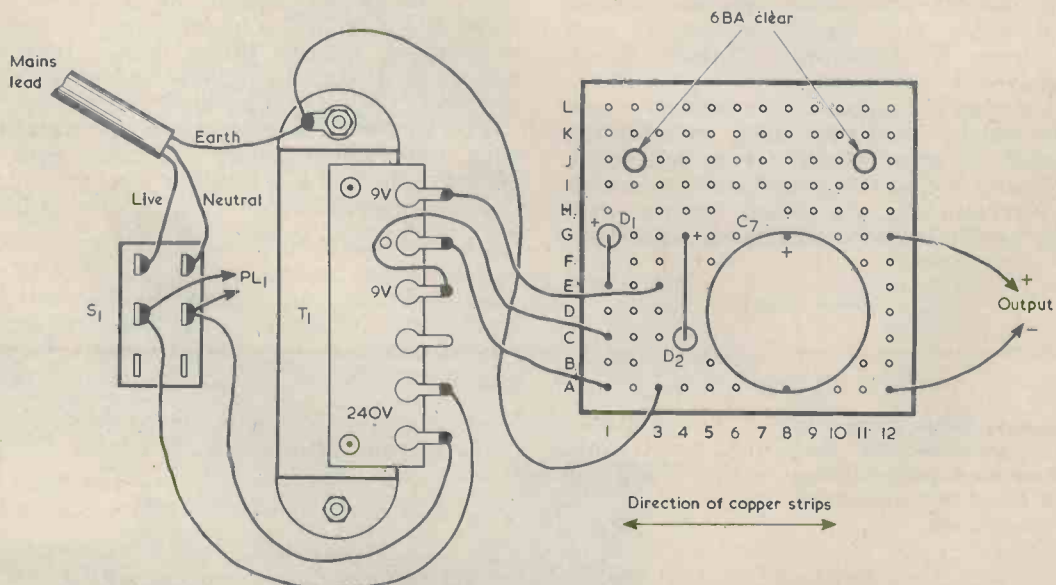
The wiring of the power supply section. The transformer tag layout is that for the particular component employed in the prototype; other transformers may have their tags positioned differently. There are no breaks in the Veroboard copper strips
